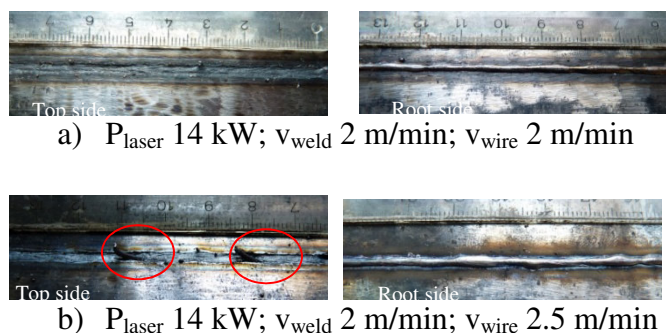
Outer appearance of laser cold wire welds; with 2 m/min wire feeding speed (a); with 2.5 m/min wire feeding speed (b)
